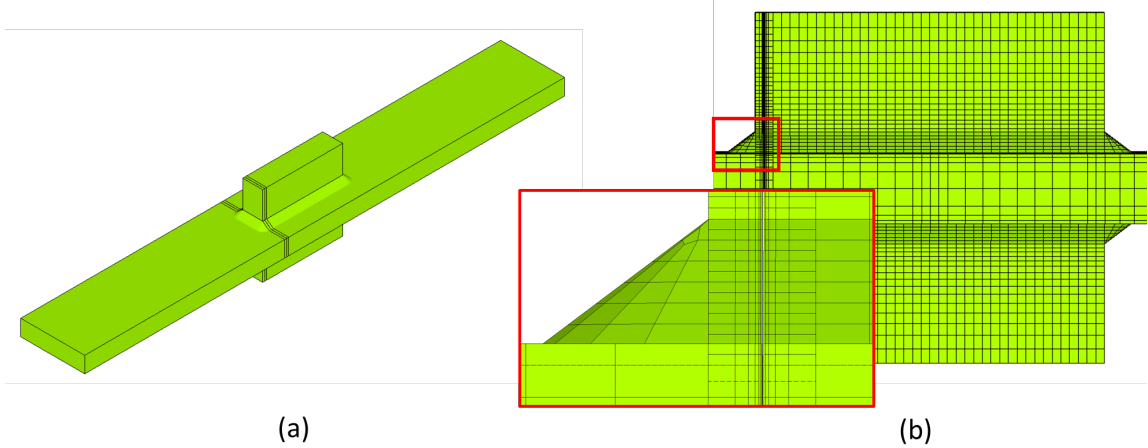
Gusset welding joint with cutting near the edge of web: (a) Geometry (b) Mesh
